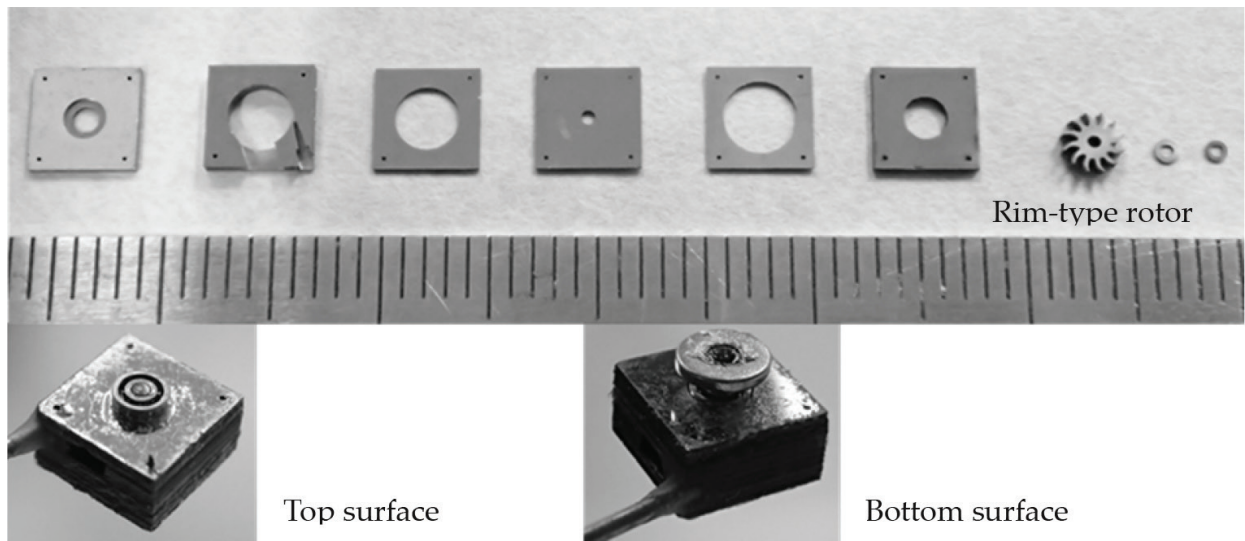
Fabricated components and assembled structure of rim-type rotor blade air turbine.
